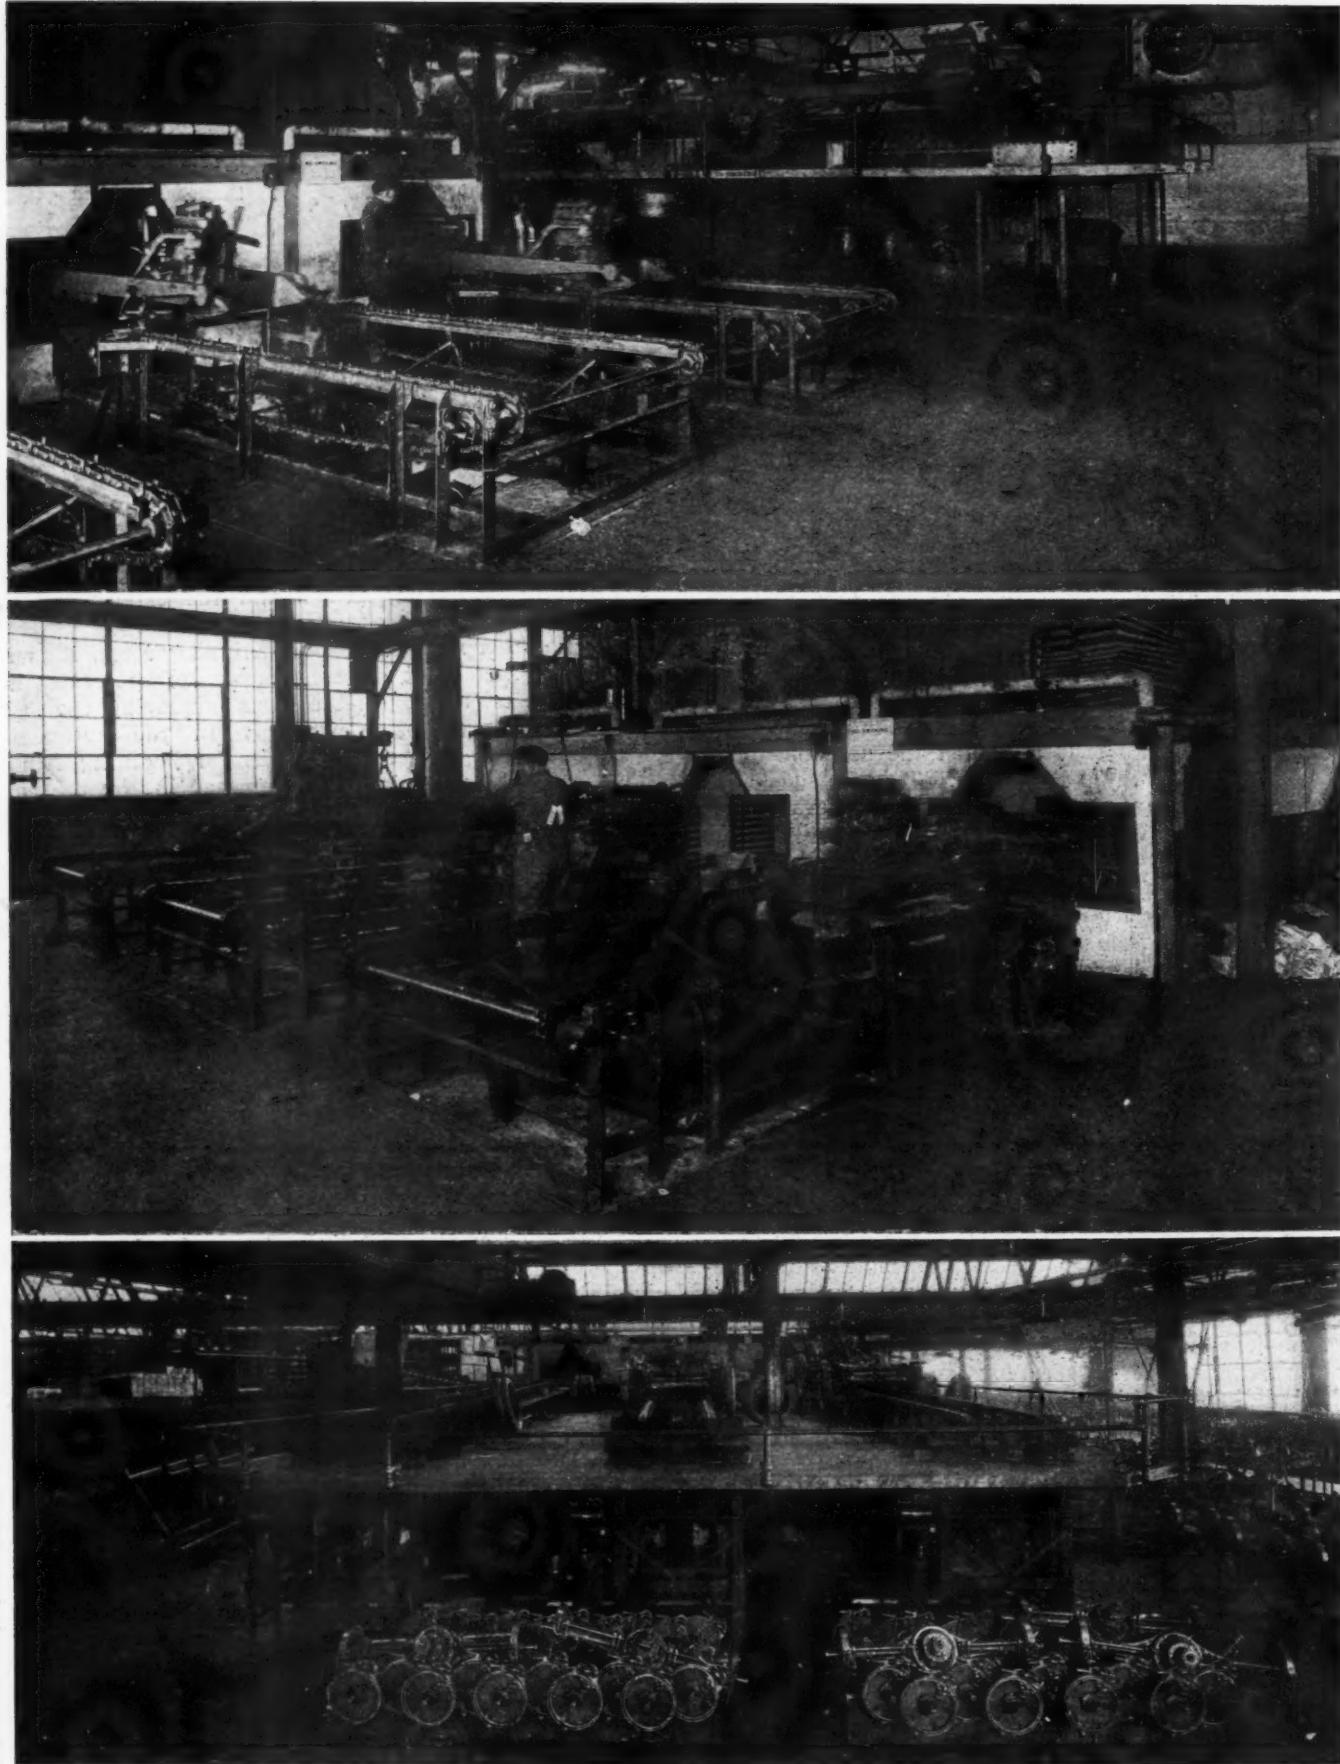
End of first assembly line, showing chassis emerging from drying oven, where they are lifted by overhead crane to platform and again sprayed.
